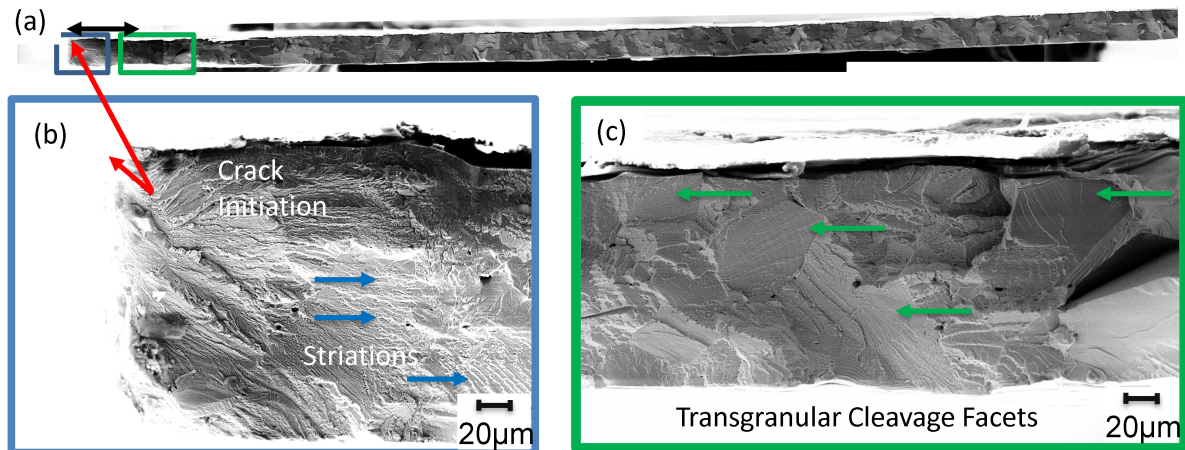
Fracture surface of single sheet sample at room temperature, low cycle fatigue, $N_f = 27,728$ cycles, (a) overall fracture surface (b) crack initiation zone with visible striations (c) transgranular cleavage facets
